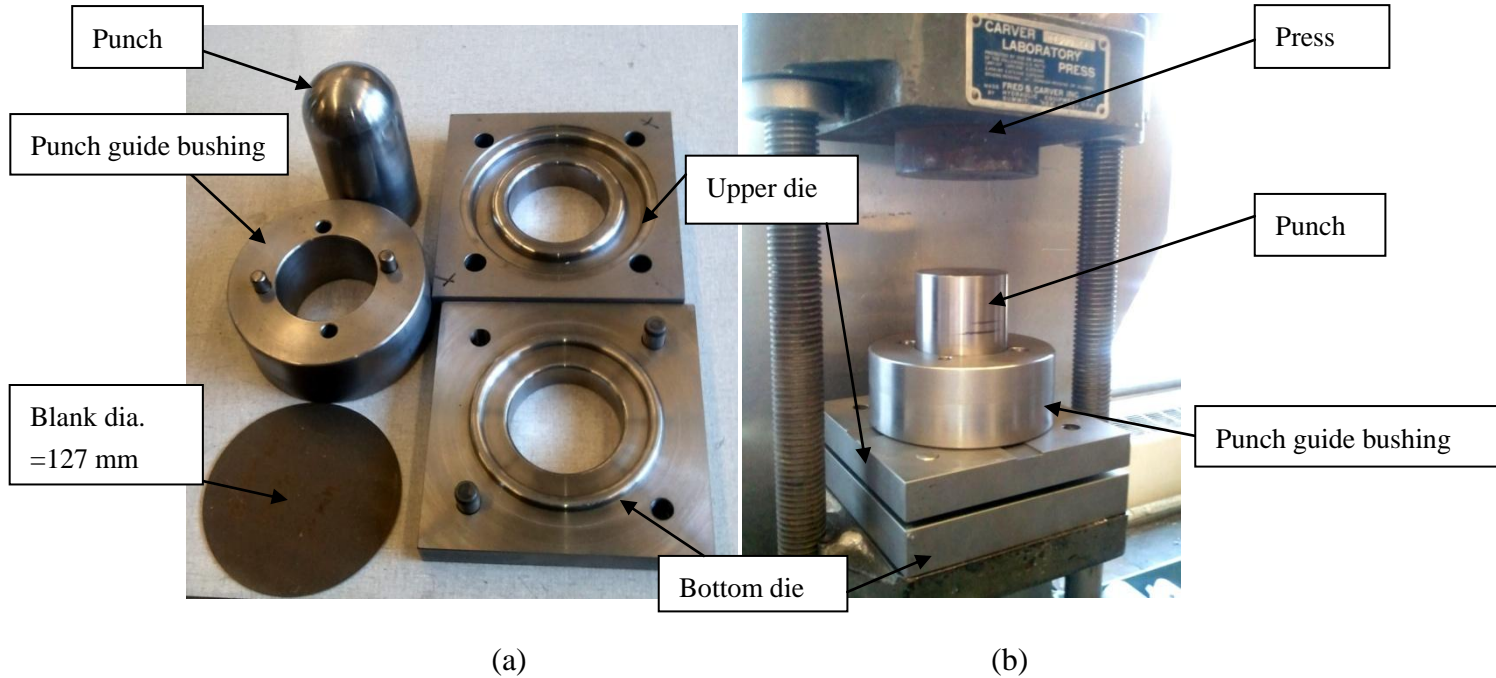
HPS test set-up, (a) tooling utilized for hemispherical punch tests, and (b) press with HPS tooling.
